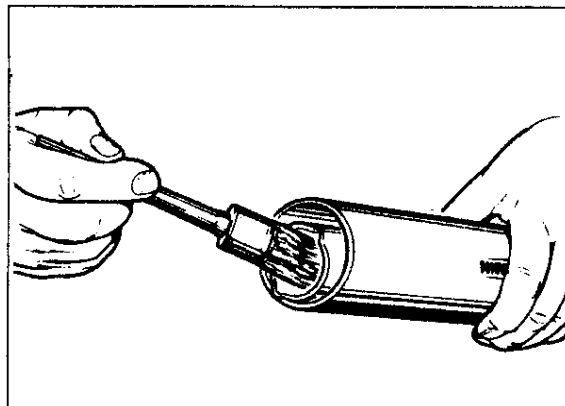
Lubricating Telescoping Section of Drive Shaft
